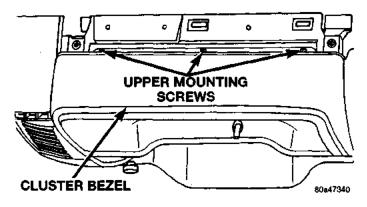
Cluster Bezel Upper Screws Remove/Install
